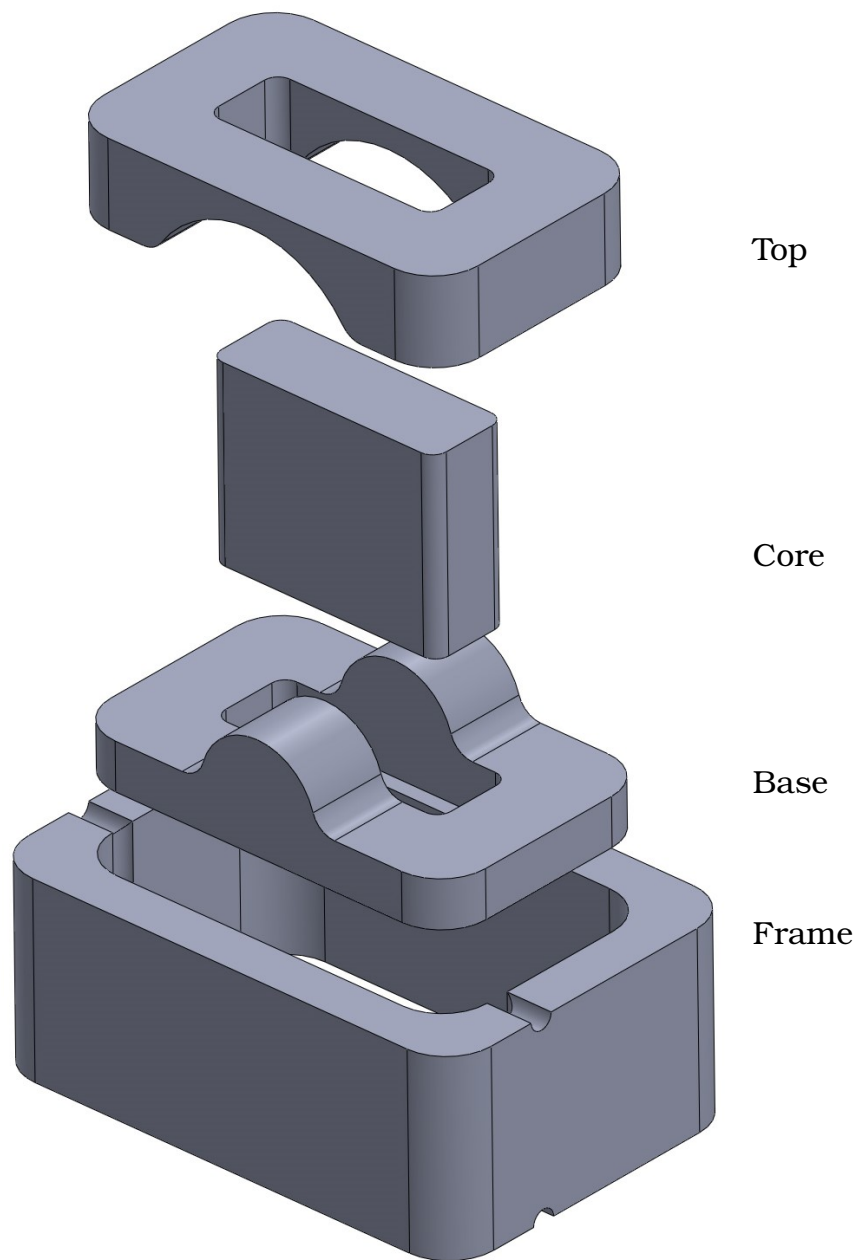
CAD models of the  $T_y$ -coil mold. The coil mold consists of four parts: the frame part confines the outer dimension of the coil, the core part defines the inner dimension, and the base and the top parts are used to press the coils in between to form the shape of the coils.
